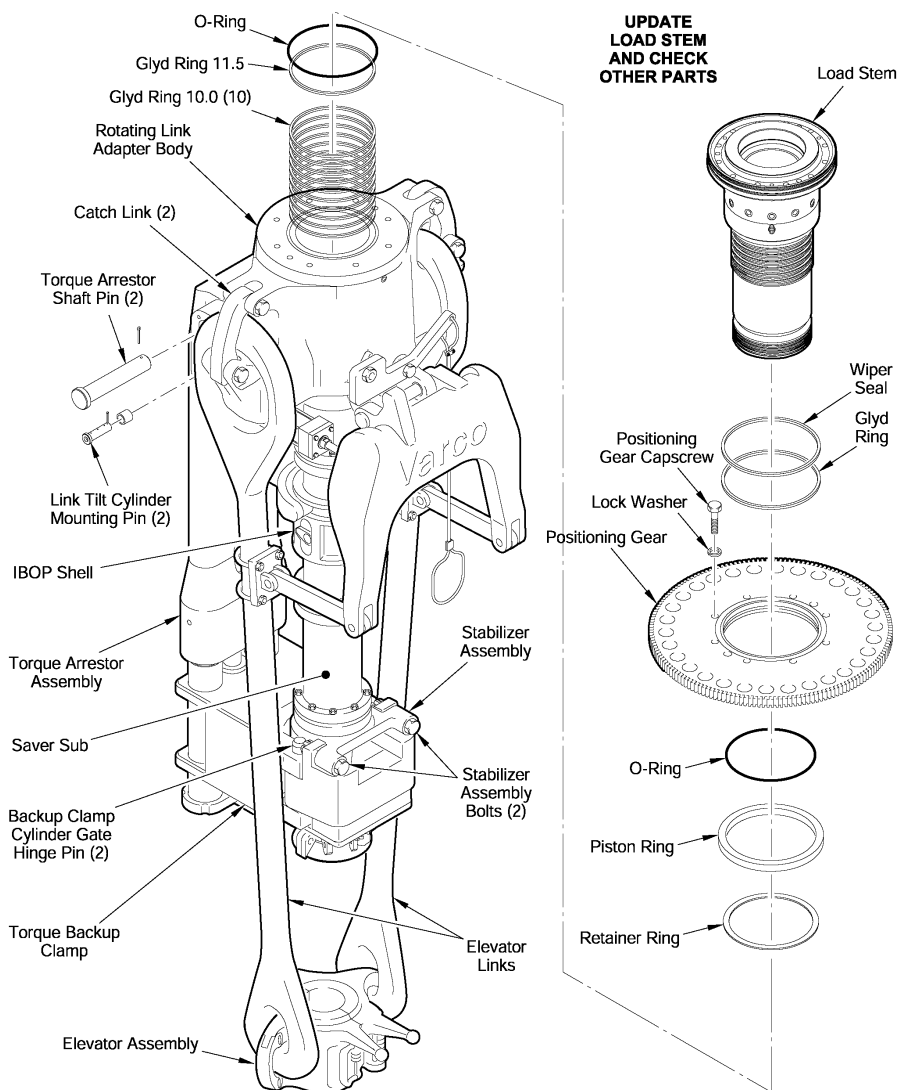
PH-55 Pipehandler assembly/disassembly
